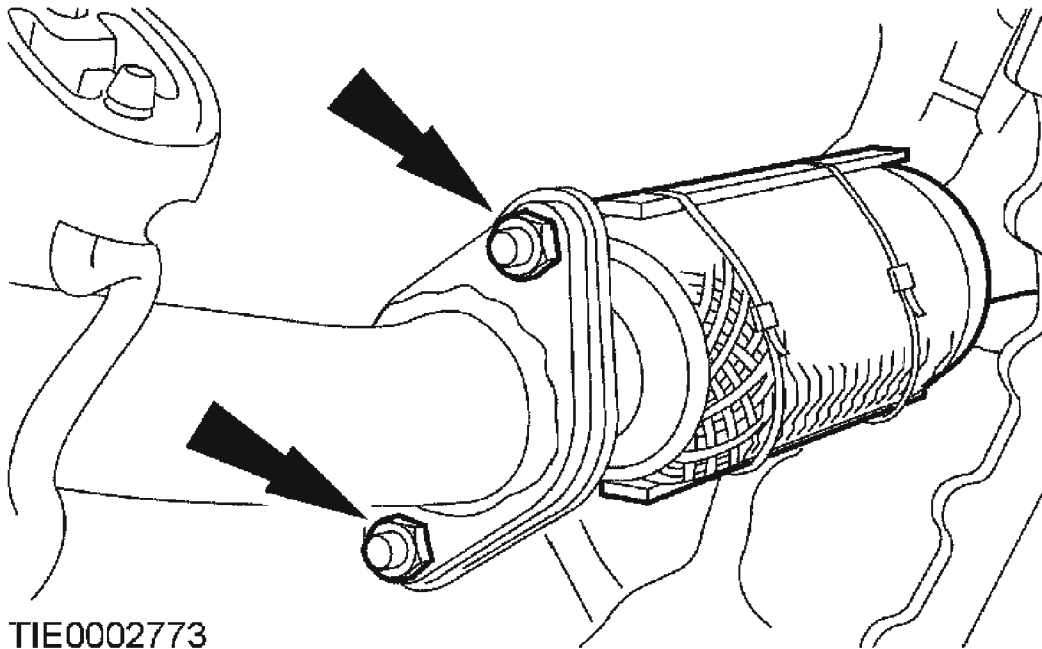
Removing Exhaust Flexible Pipe-To-Muffler Assembly Nuts
